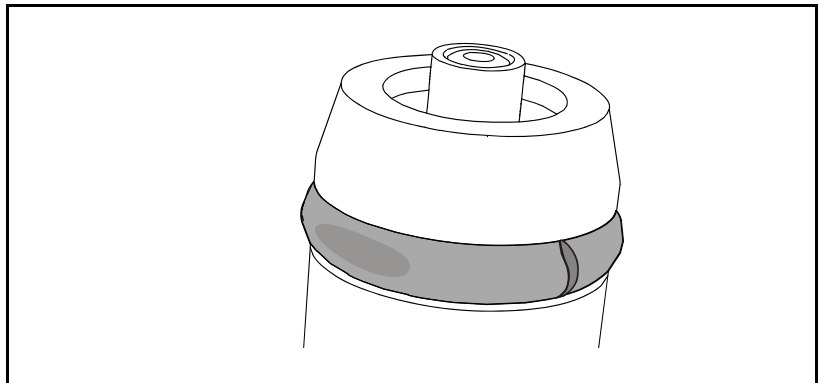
Cracks and abrasion on O-ring.
